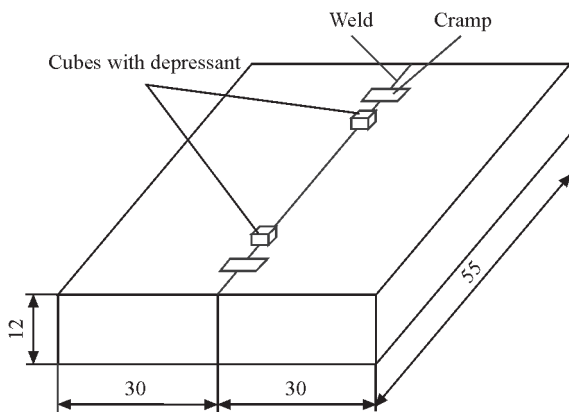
Scheme of assembly of a butt joint of ChS70-VI alloy
